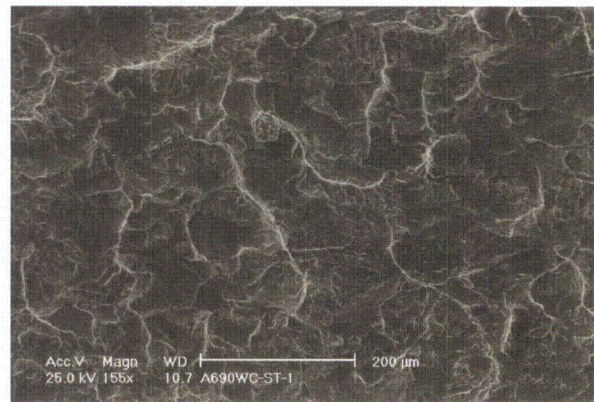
Fracture surface of specimen A690WC-ST-1. Crack advance is from bottom to top.
